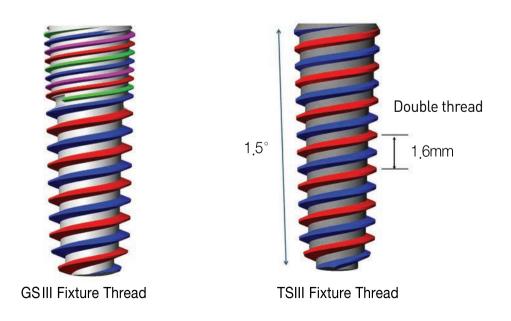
TSIII fixture thread is a single macro thread. It is a dual thread structure in which each rotation installs two pitches (1.6mm).
